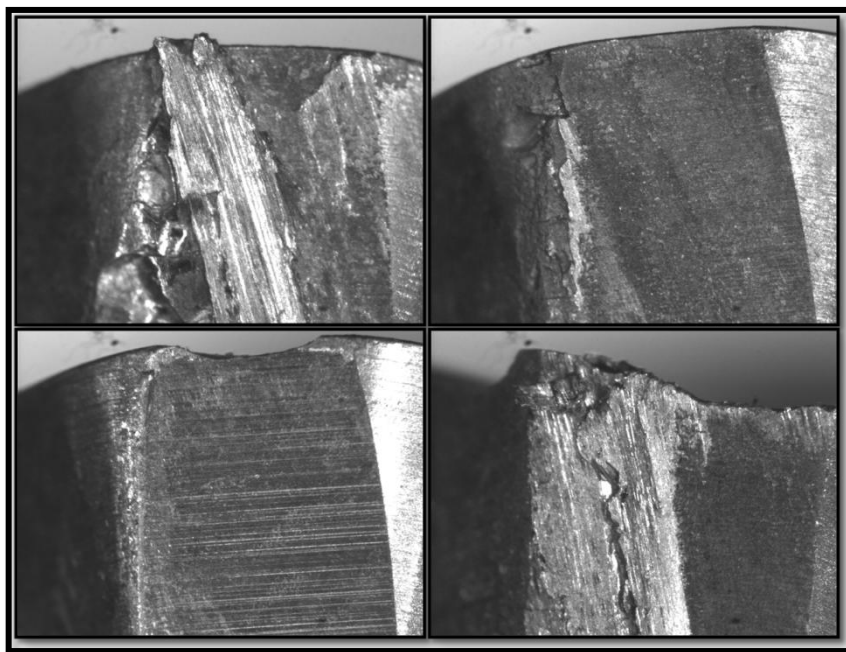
Figure shows flank face of the inserts used for the milling using CPO as cutting fluid (Magnification 2X)
